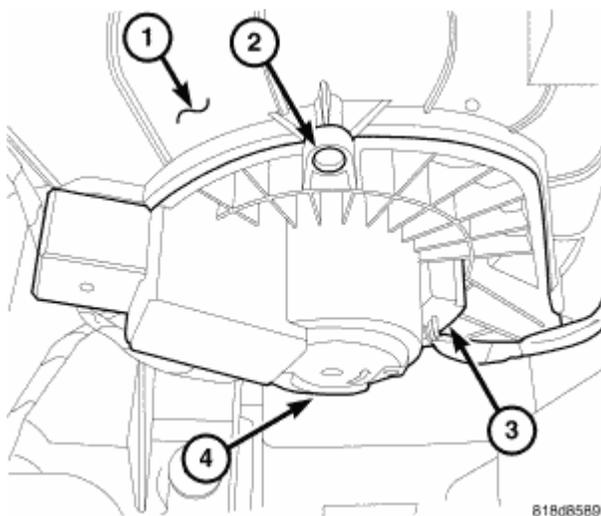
HVAC Housing, Screws, Instrument Panel Wire Harness Connector & Blower Motor
